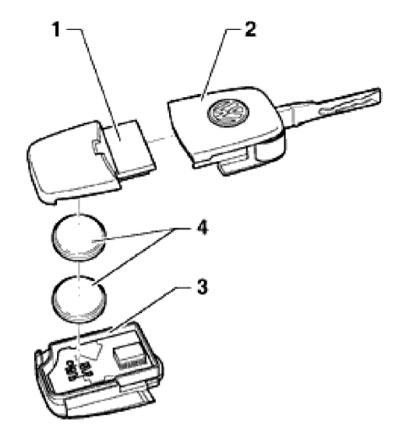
Exploded View Of Remote Control Courtesy of VOLKSWAGEN OF AMERICA, INC.
